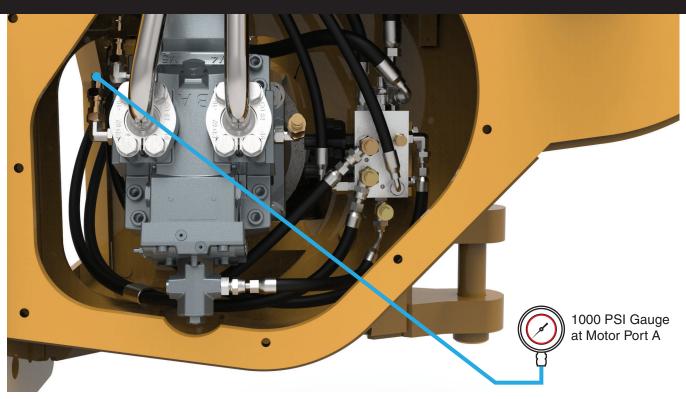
Counterbalance Valve Pressure Check (L39 shown)
